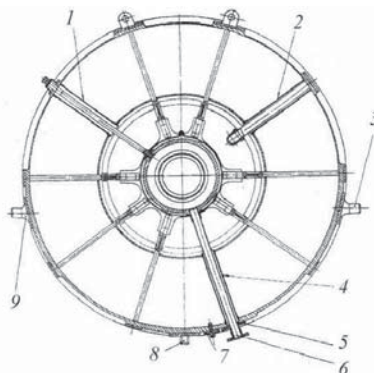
Cross-section of the rear support housing of the D050 power turbine [15]:
